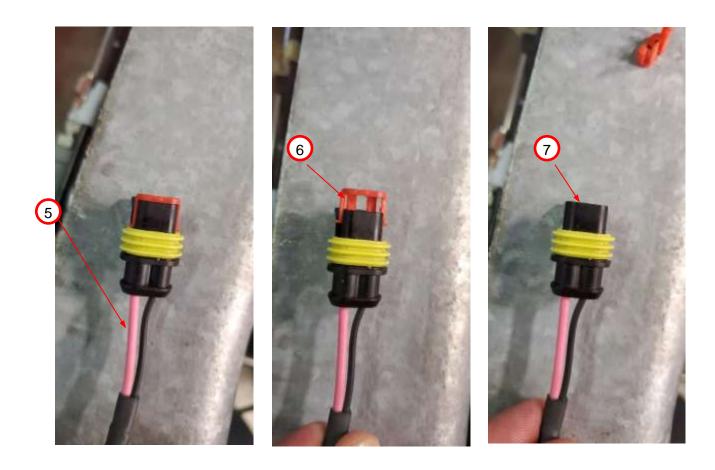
Supply Harness removed (5), TPA Clip (6), TPA removed (7)
